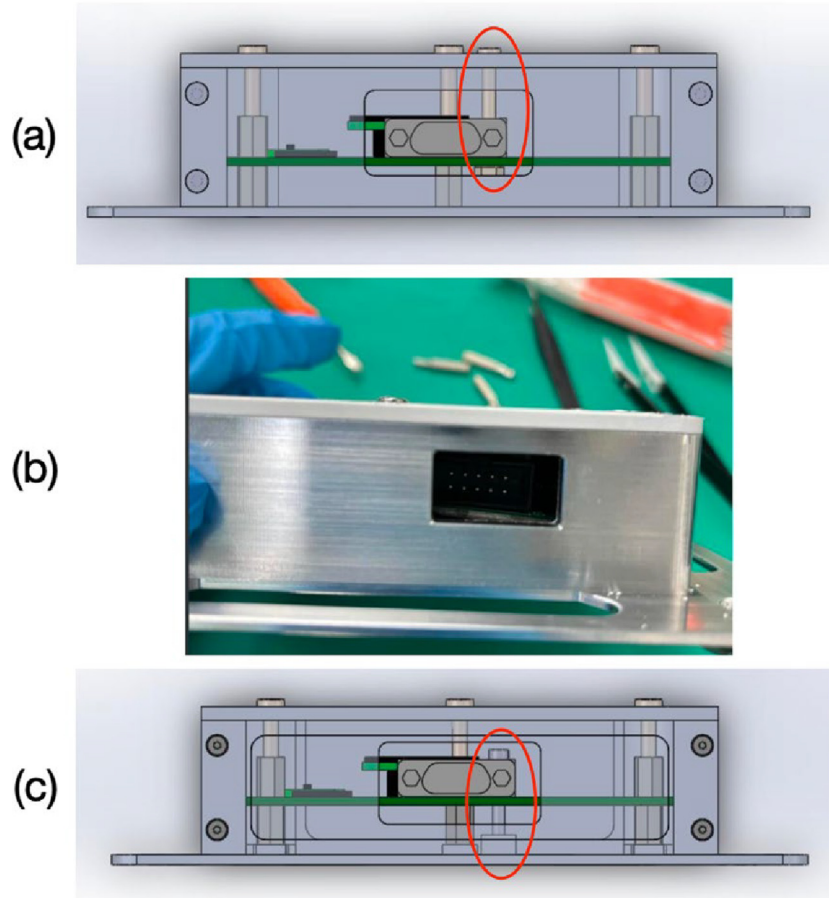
(a) Initial layout of fasteners used to secure DSRP PCB to payload chassis. (b) Warped PCB resulting from bake out of initial fastener layout. (c) Revised fastener layout used in DSRP FM to prevent PCB warping when heated. Altered fastener marked by red oval.
